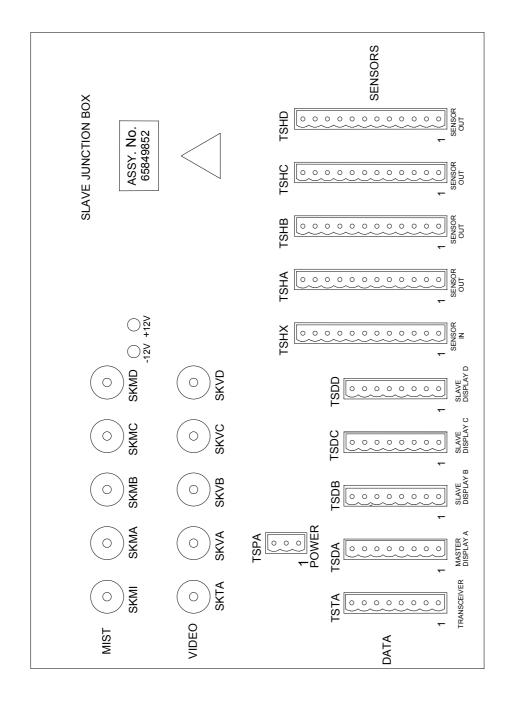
Connector Layout for Slave Junction Box PCB Assembly 65849852
